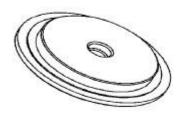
VM 9991 Camshaft Locking Tool Courtesy of CHRYSLER LLC
